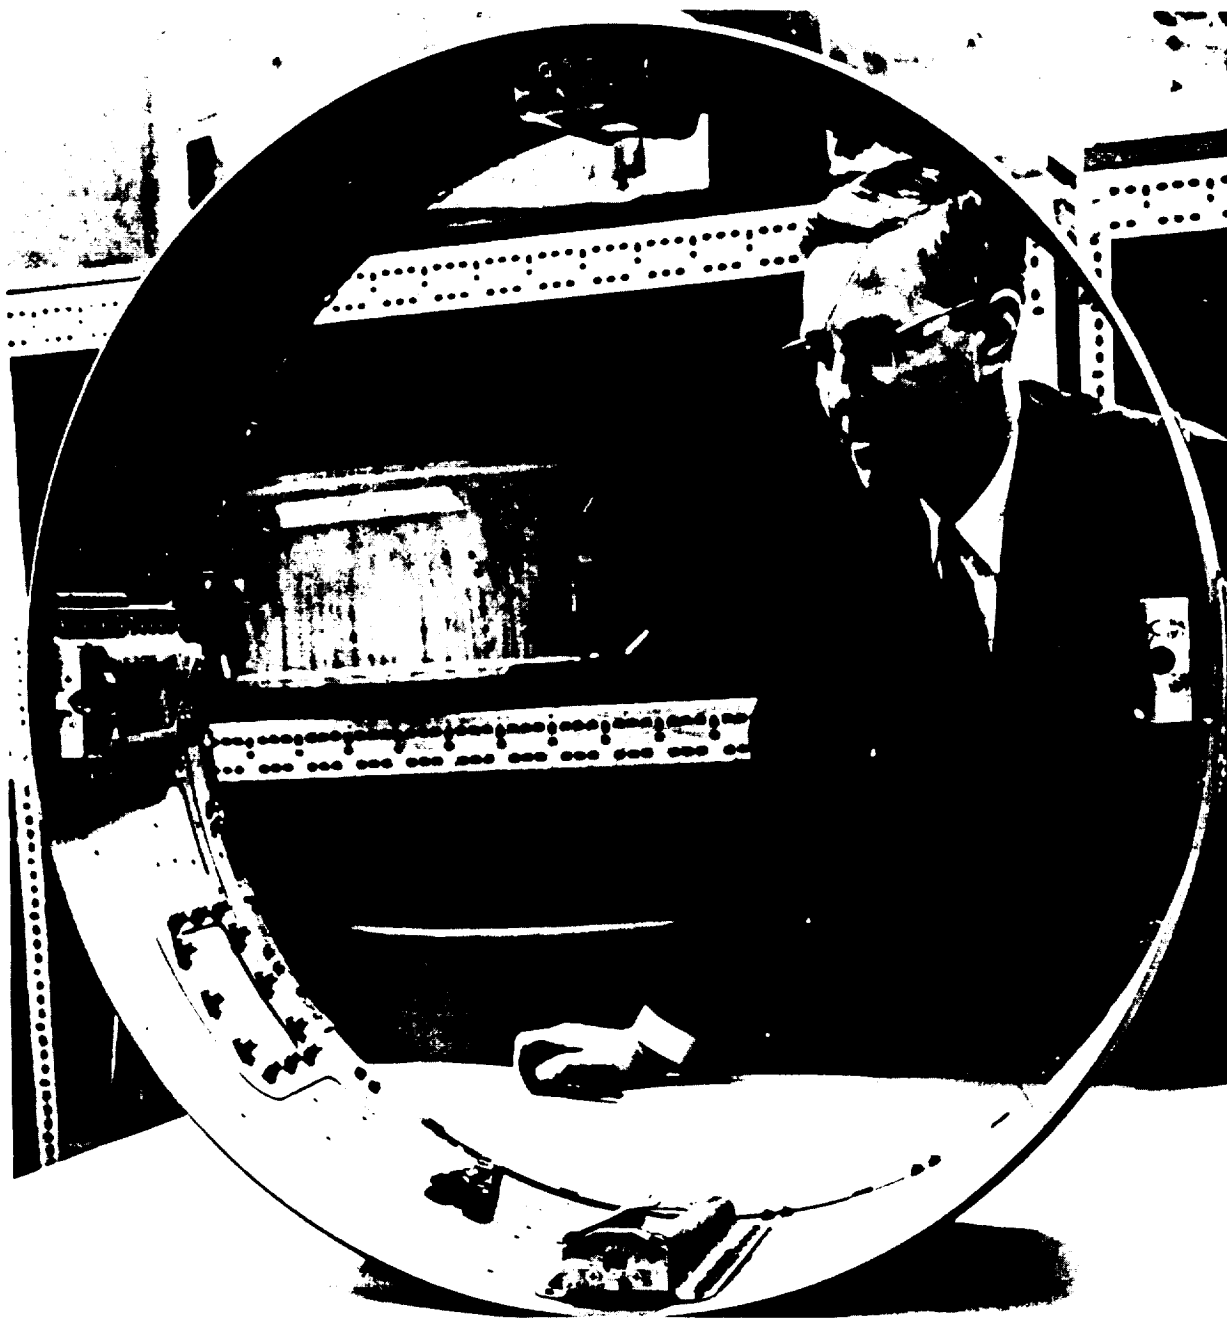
Overall View of Interior of Beryllium Spacer Assembly
